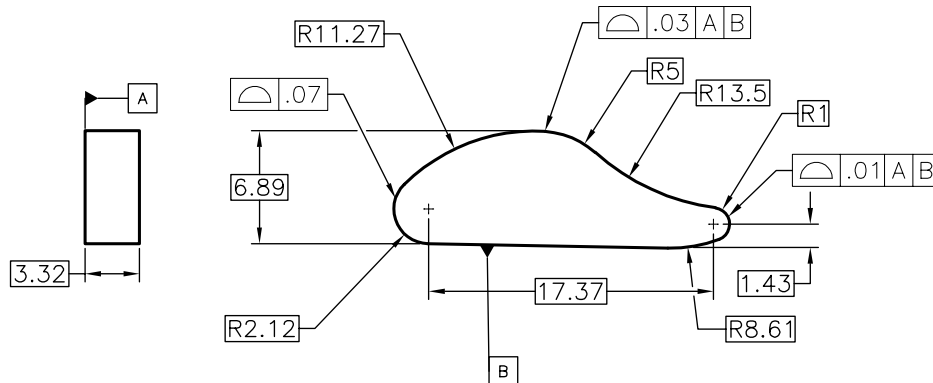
Specifying different profile tolerances on a segment of a profile
